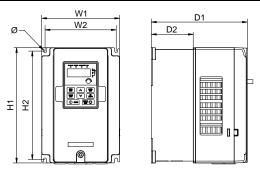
Wall installation diagram of 7.5kW–15kW single VFD integrated machine Table A-2 Wall installation dimension of 7.5kW–15kW single-VFD integrated machine (unit: mm)
